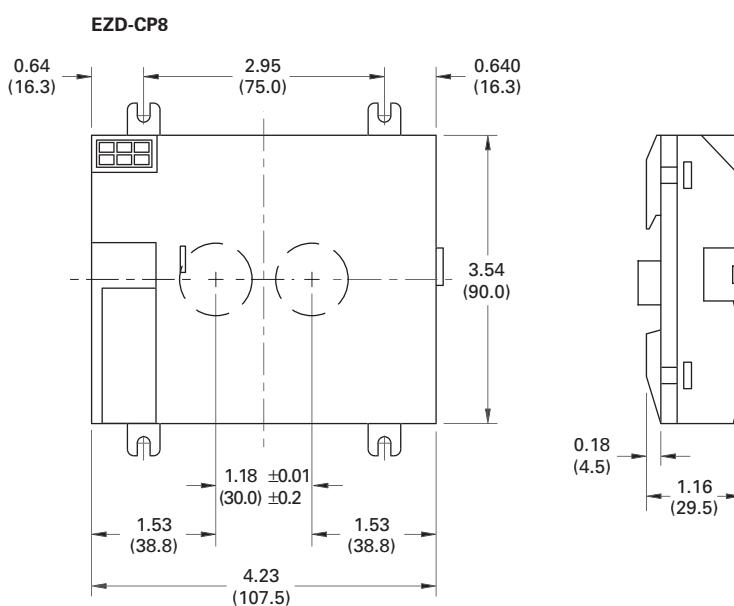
EZD-CP8 Series Dimensions in Inches (mm), Drawing Number MD05013006E
